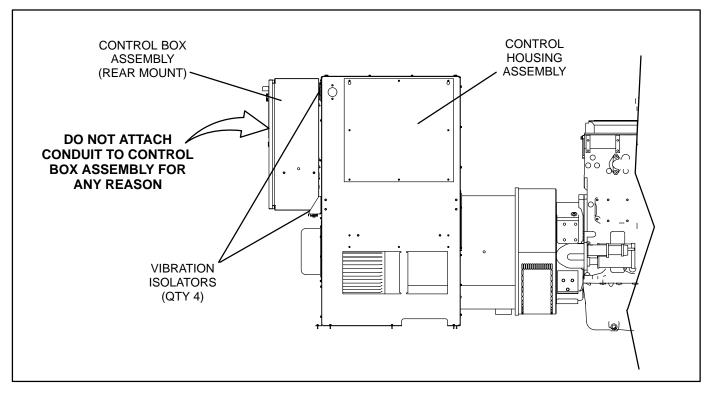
CONTROL BOX – REAR MOUNT
